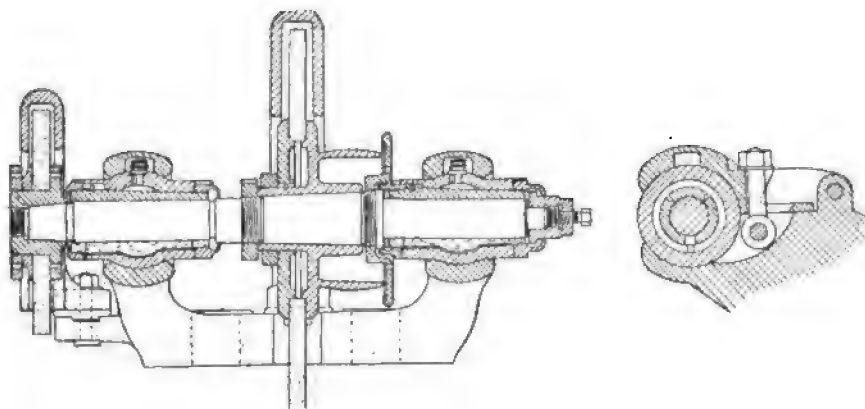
Bearings with Endlong and Swivel Adjustments.
